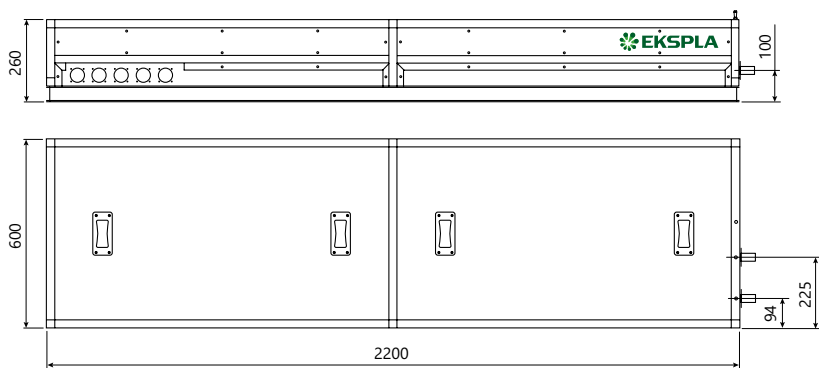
ANL25kSS-AWG laser head outline drawing (actual dimensions might vary)
